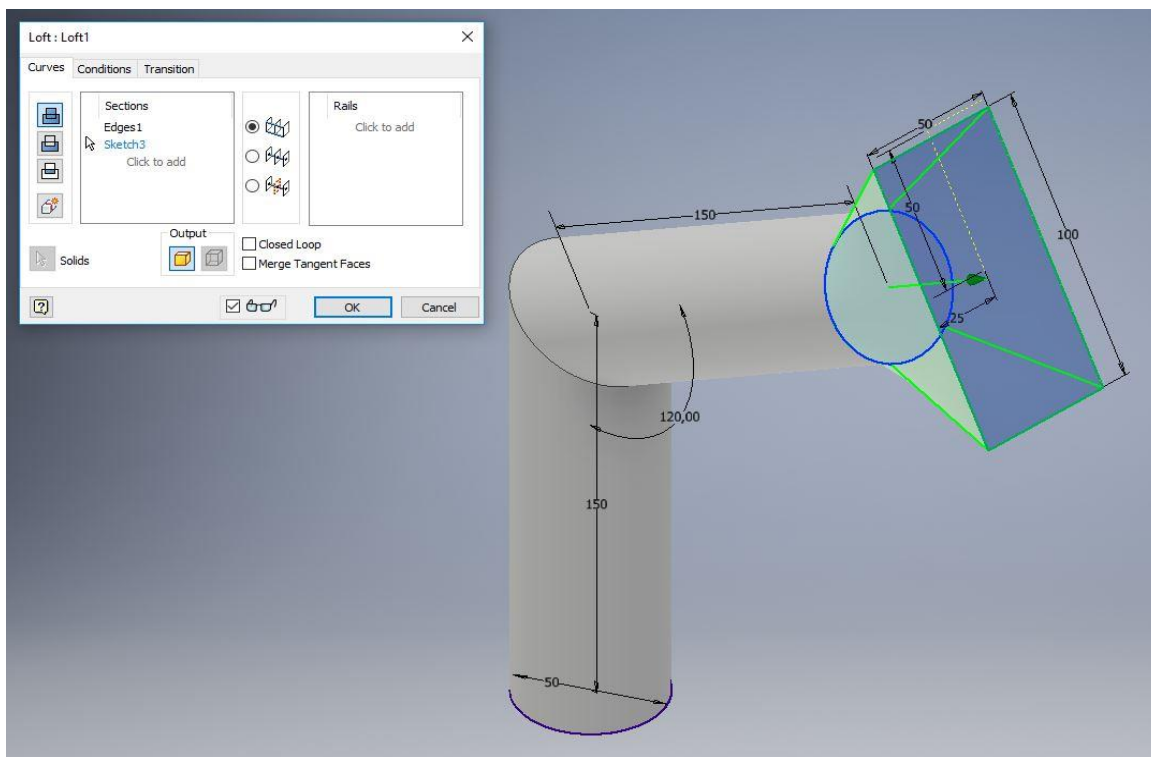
The first nozzle-transition piece designed using the “Loft” tool.
